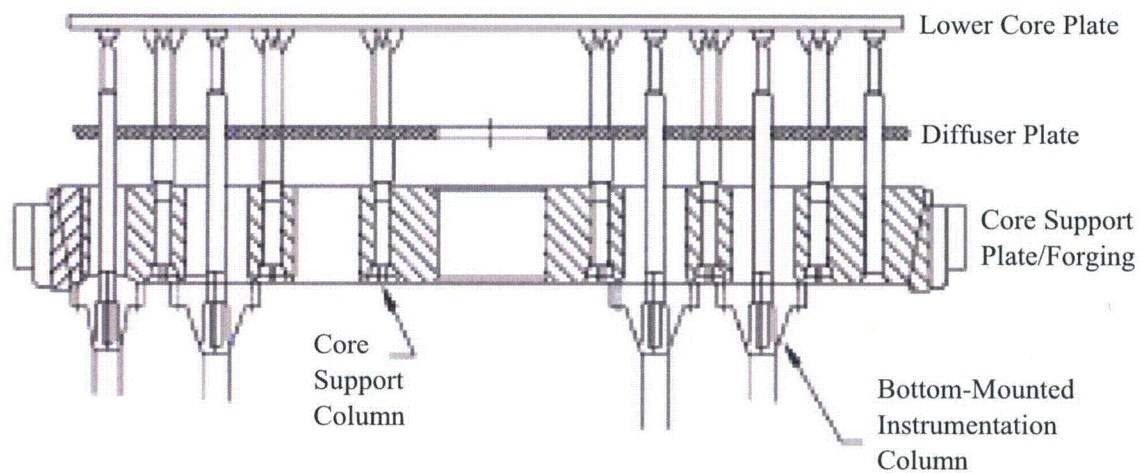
Westinghouse Lower Core Support Structure – Cross-Section
